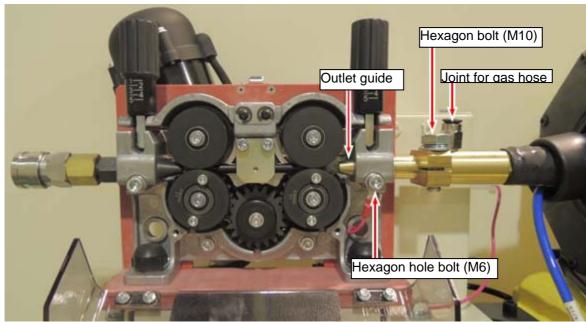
(e) Remove the thumbscrews of wire feeder
